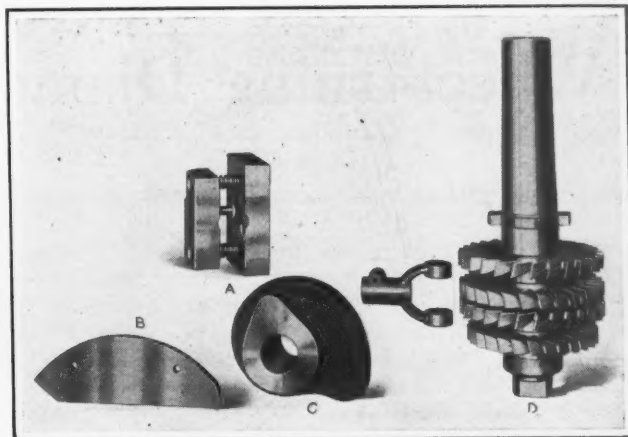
(A) Jaws used on Special Fixtures. (B) and (C) Index and Feed-cams used on Machine. (D) Cutters mounted on Arbor
